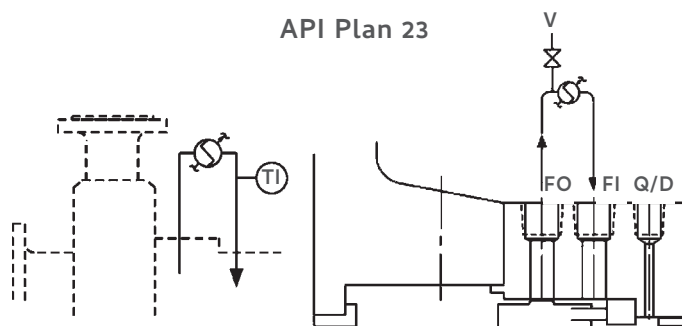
Recirculation from a pumping ring in the seal chamber through a cooler and back into the seal chamber.
